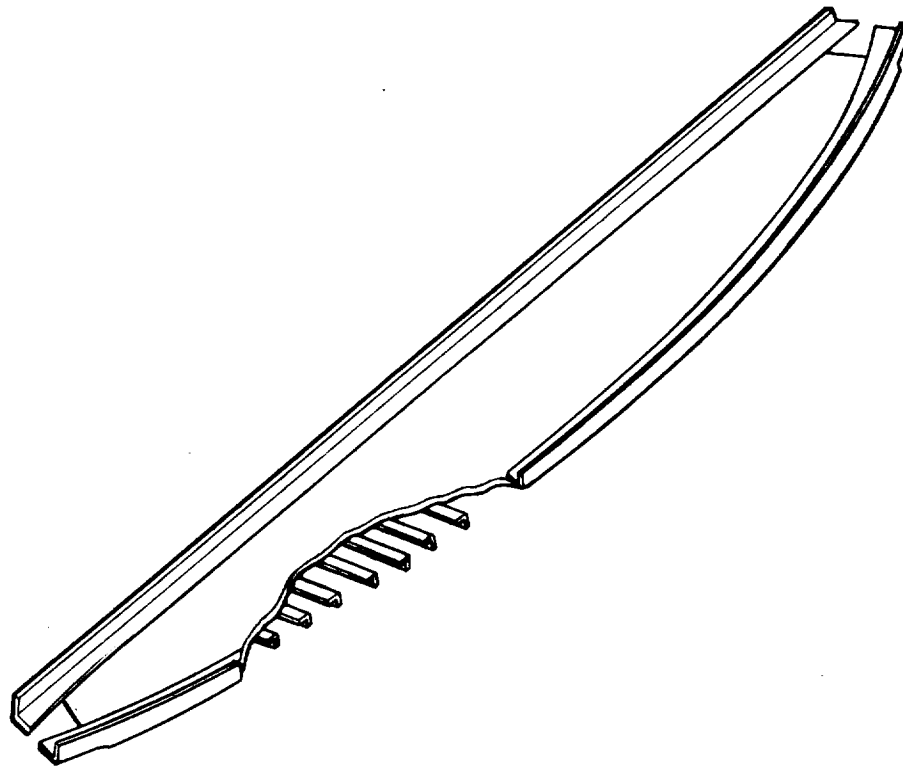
DETAIL D INTERMEDIATE RING ASSEMBLY
